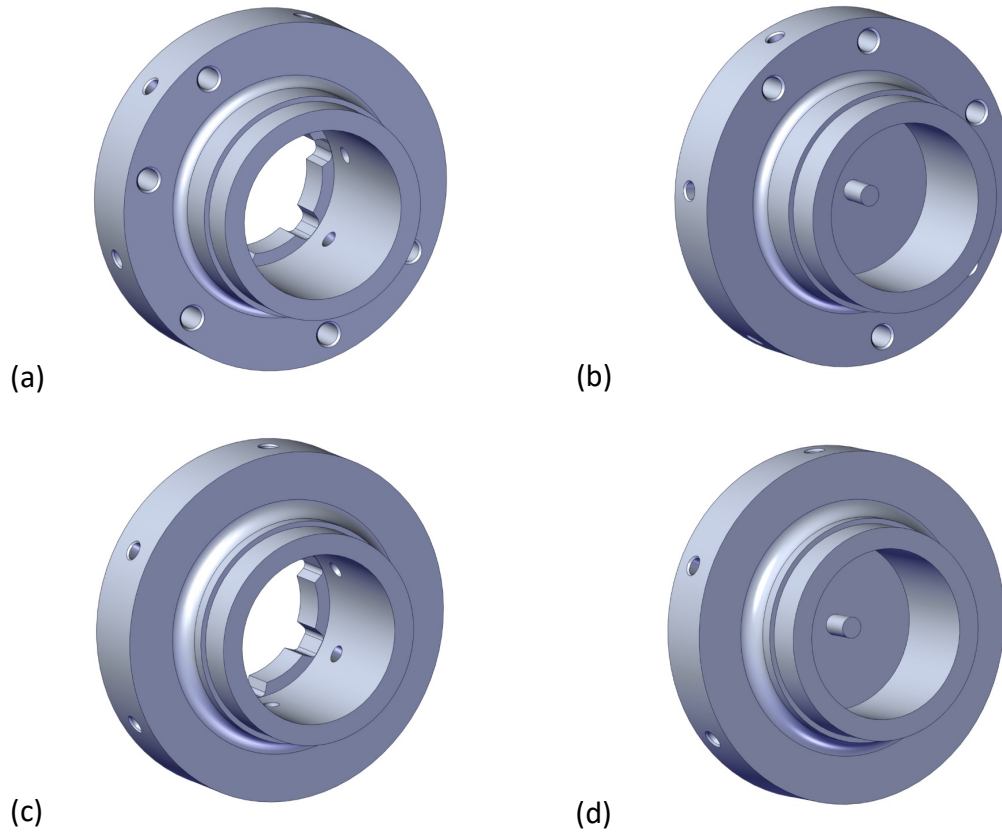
a) Shoulder joint actuator through drive-side stub axle. b) Shoulder joint actuator non-drive-side stub axle. c) Knee joint actuator through drive-side stub axle. d) Knee joint actuator non-drive-side stub axle.
